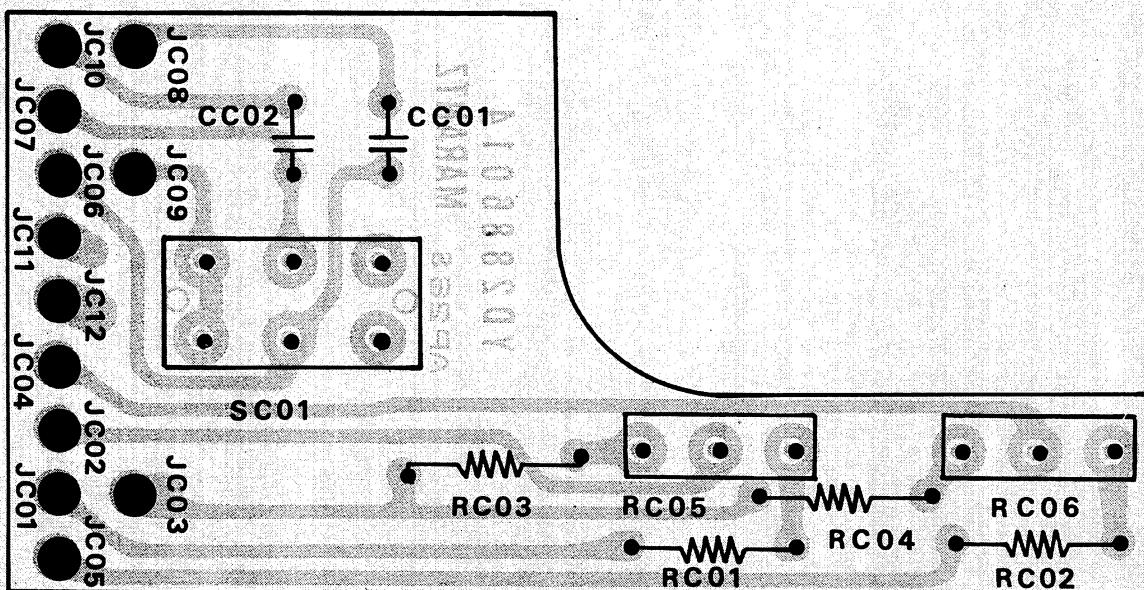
FM Cal, FM De-Emphasis Assembly PC01 Component Locations
